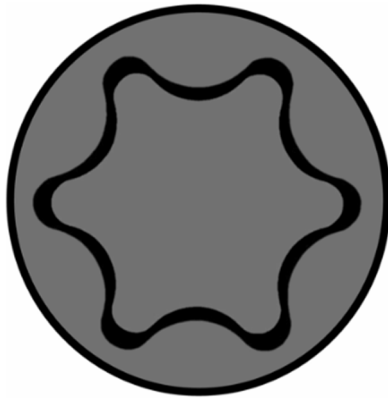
Schematic Representation of the Screw Head Geometry of Torx Design. *Lobe*: The Protruding Parts of the Screw Head that Engage with the Driver. *Lobe Arc*: The Curved Edge of a Single Lobe, Indicating its Shape and Profile. *Driving Angle*: The Angle between the Screwing Direction and the Side of the Lobe. Created Using Adobe Illustrator CC 2023 (Adobe Inc., San Jose, CA, USA)
